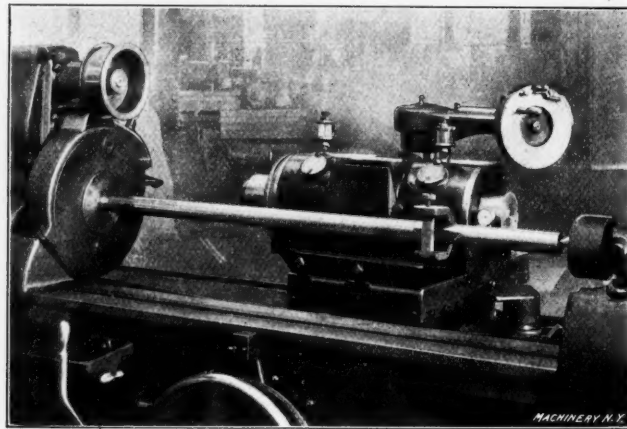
Testing Wheel Spindle Alignment on Plain Machine
